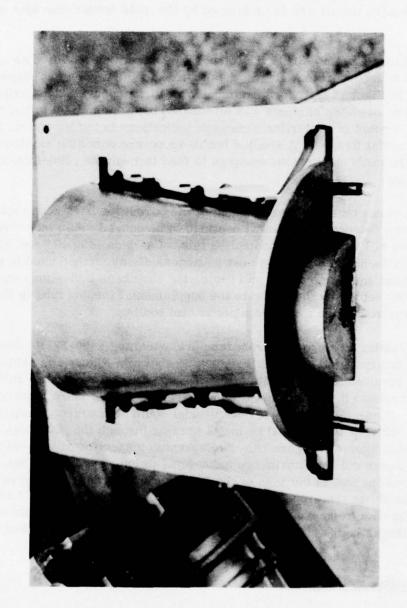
Temporary Tooling Modified to Produce Net Shape Aft End
